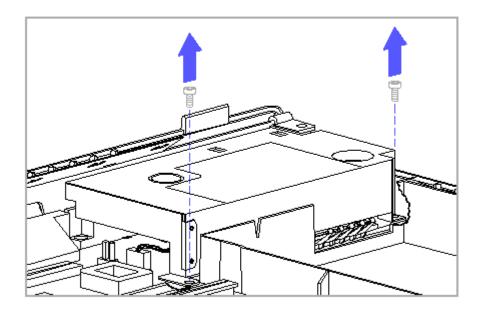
Removing the Top Internal AC Power Supply Screws
